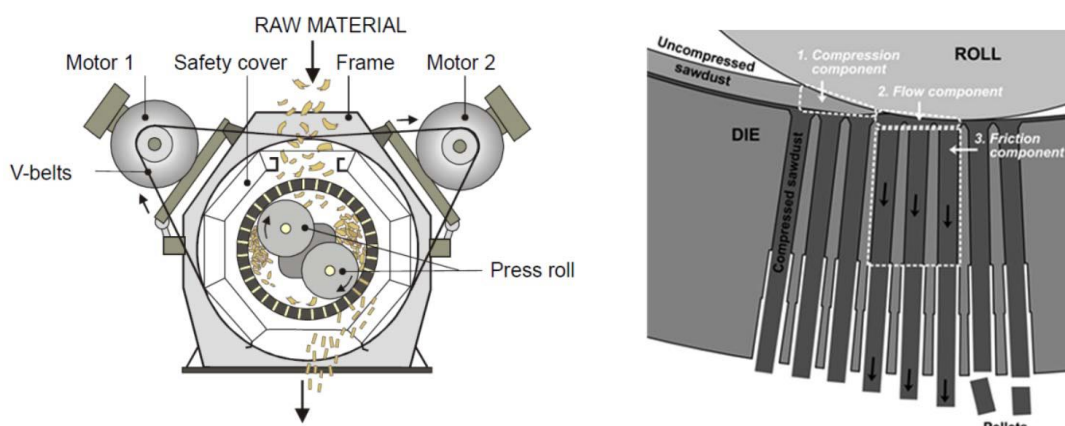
The process of manufacturing pellets with rotary ring presses and fixed pressing rollers
